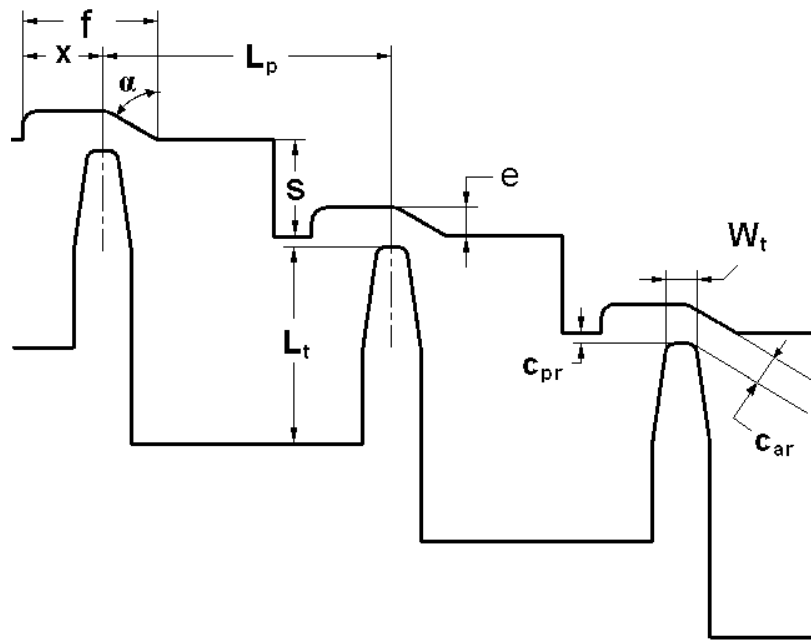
Geometry and dimensions of the labyrinth seal with rub-groove.
